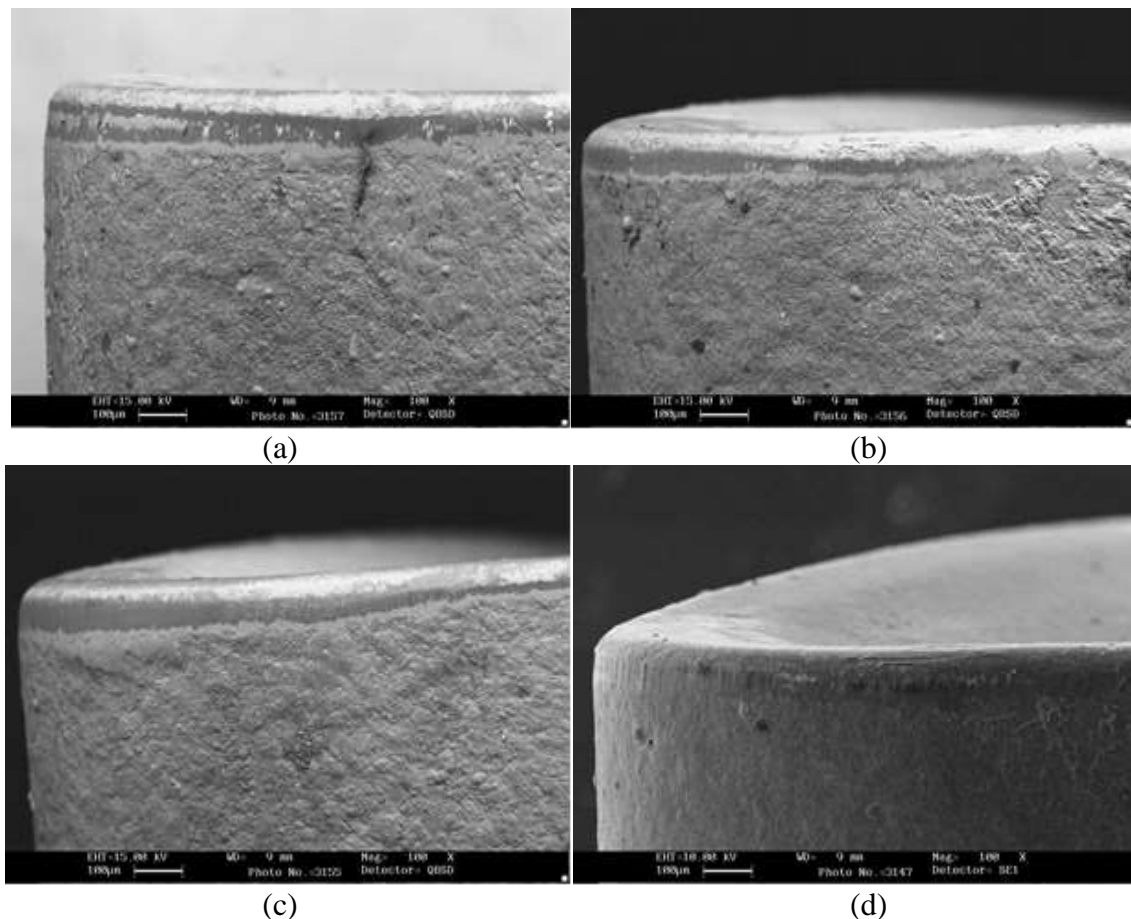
SEM images of the tool wear (a) Dry (b) Wet (c) MQL (d) Solid lubricant assisted machining
